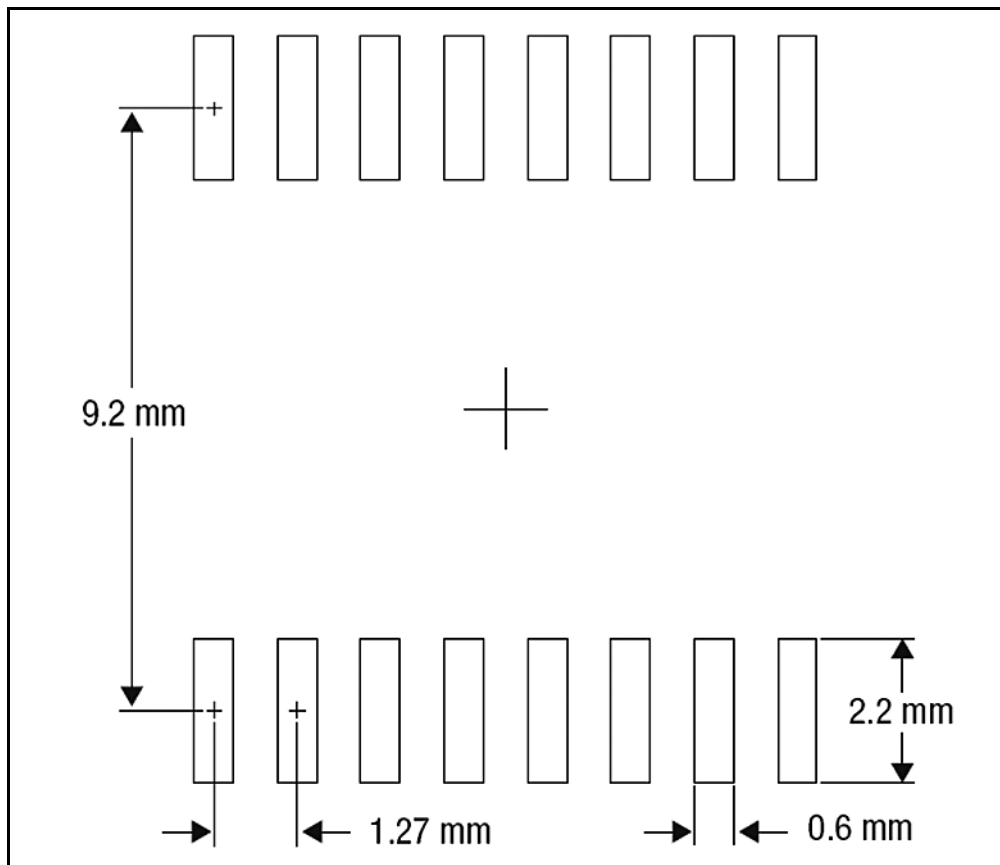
Suggested PCB Pad Layout (SOIC14 Wide Package)
